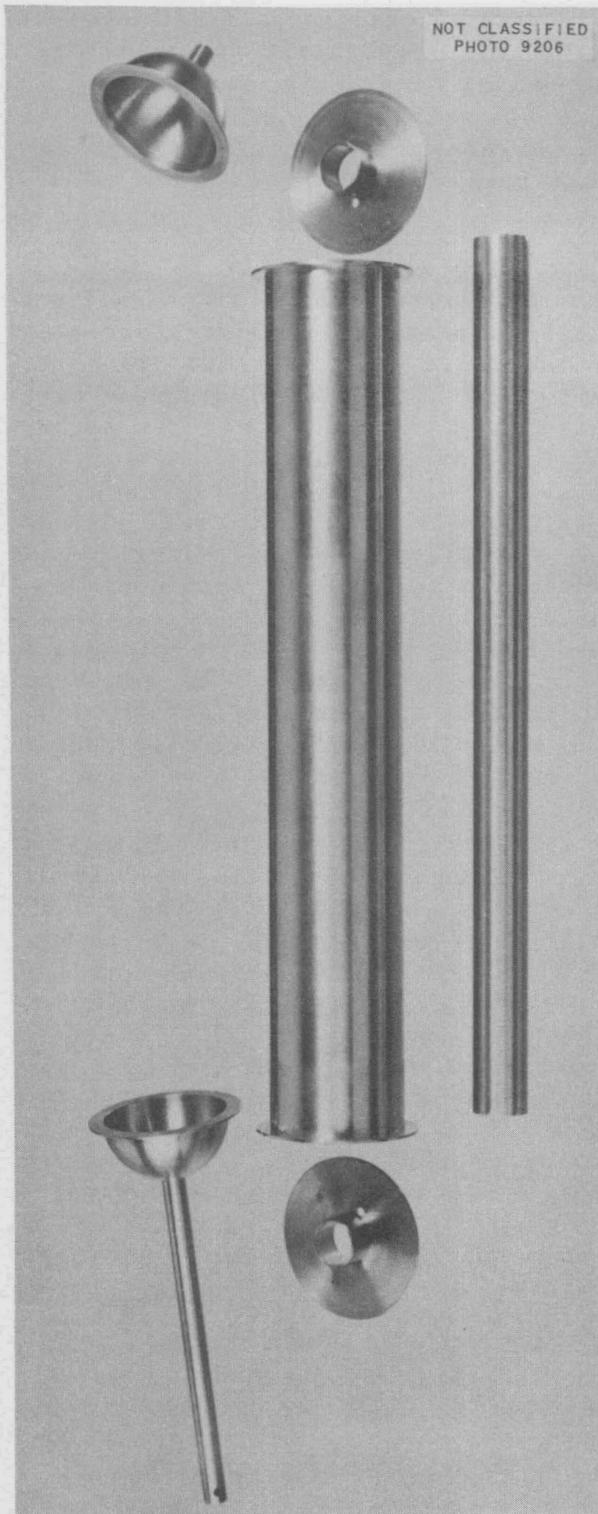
Component Parts of Titanium Plummet Before Welding. Unassembled.
